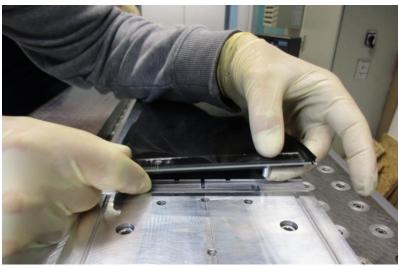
Dowel pins for positioning the endpieces with respect to the jig
